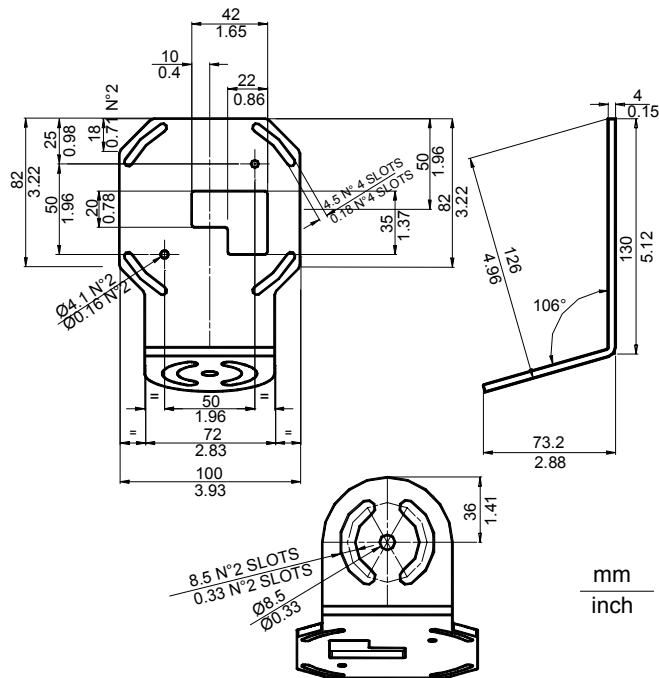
ST-237 Mounting Bracket Overall Dimensions
